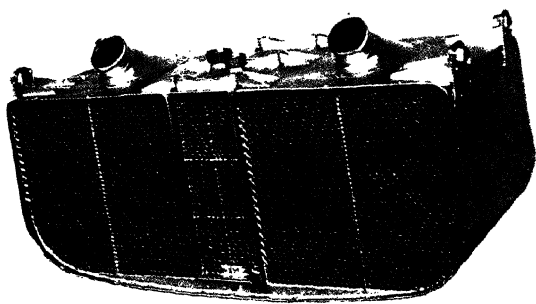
The Serek combined radiator and oil cooler, incorporating also carburettor warm air intake.
